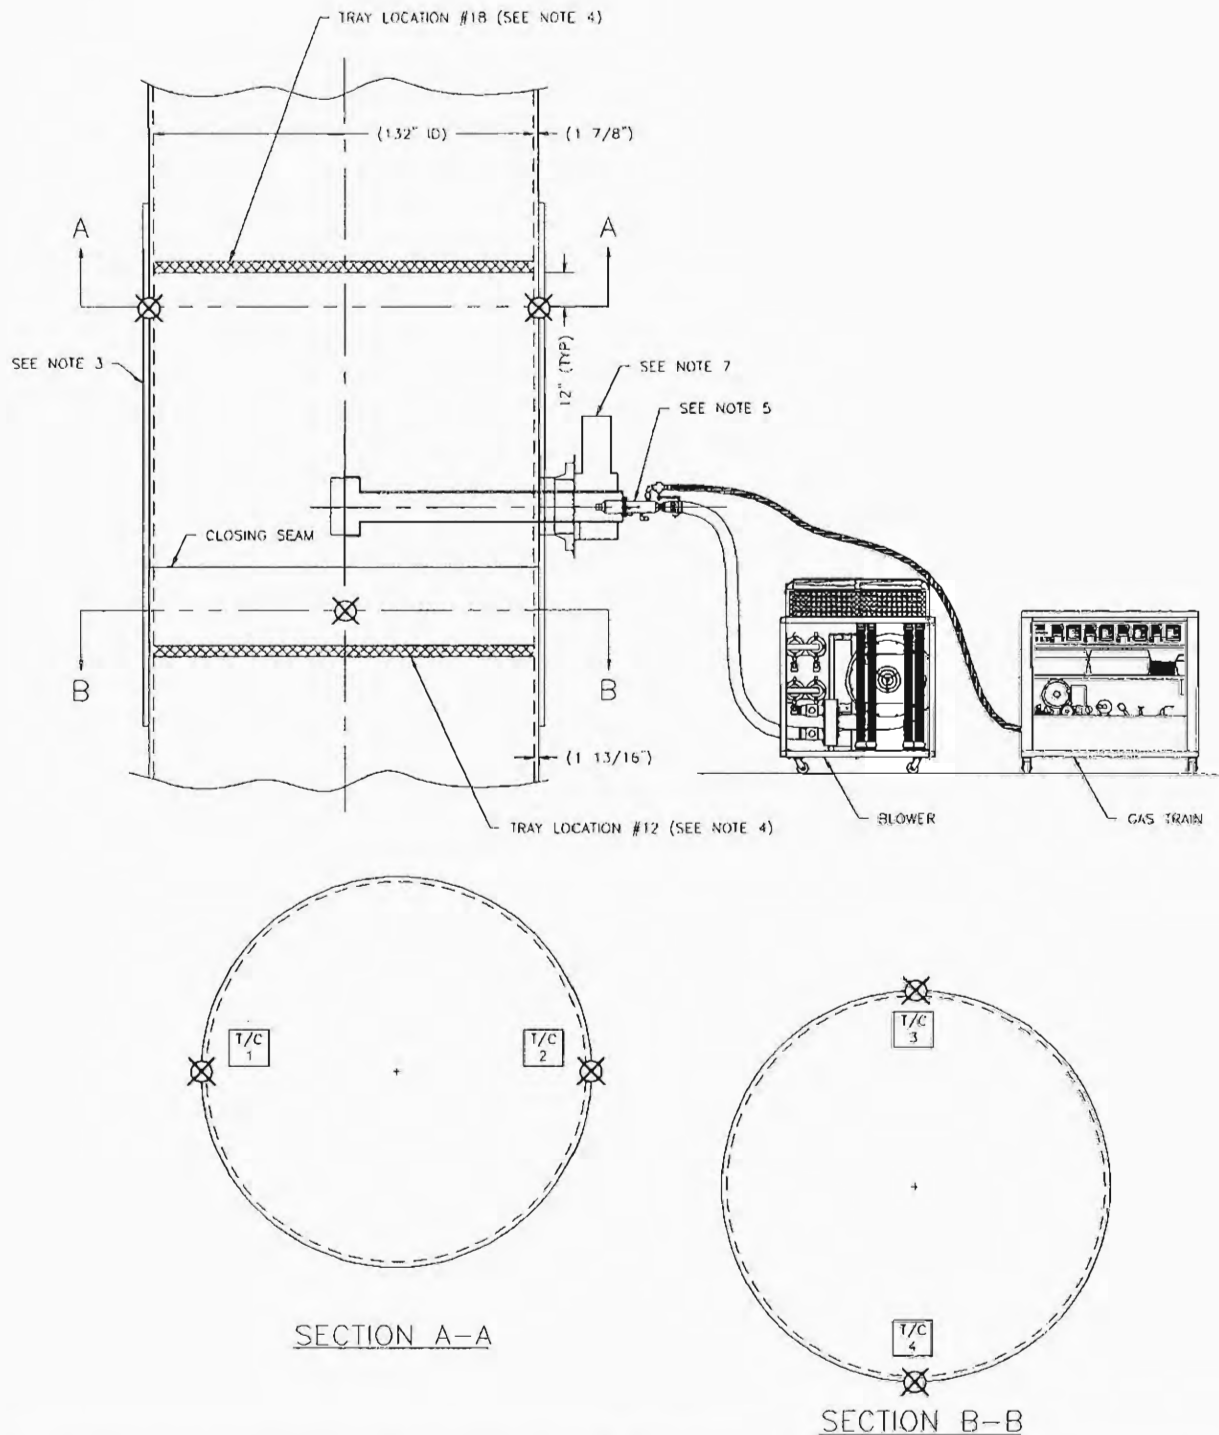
Burner and thermocouple layout for case history described in section 17.1.1 in which internal gas firing with supplemental electric resistance heating was used for full circumferential PWHT of a circumferential seam weld in a de-ethanizer vessel.
